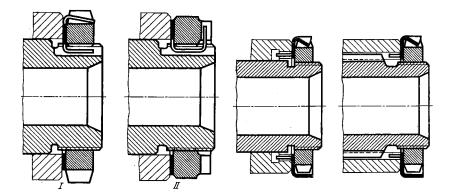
Improper (I) and proper (II) setting of safety washers on highspeed shafts
